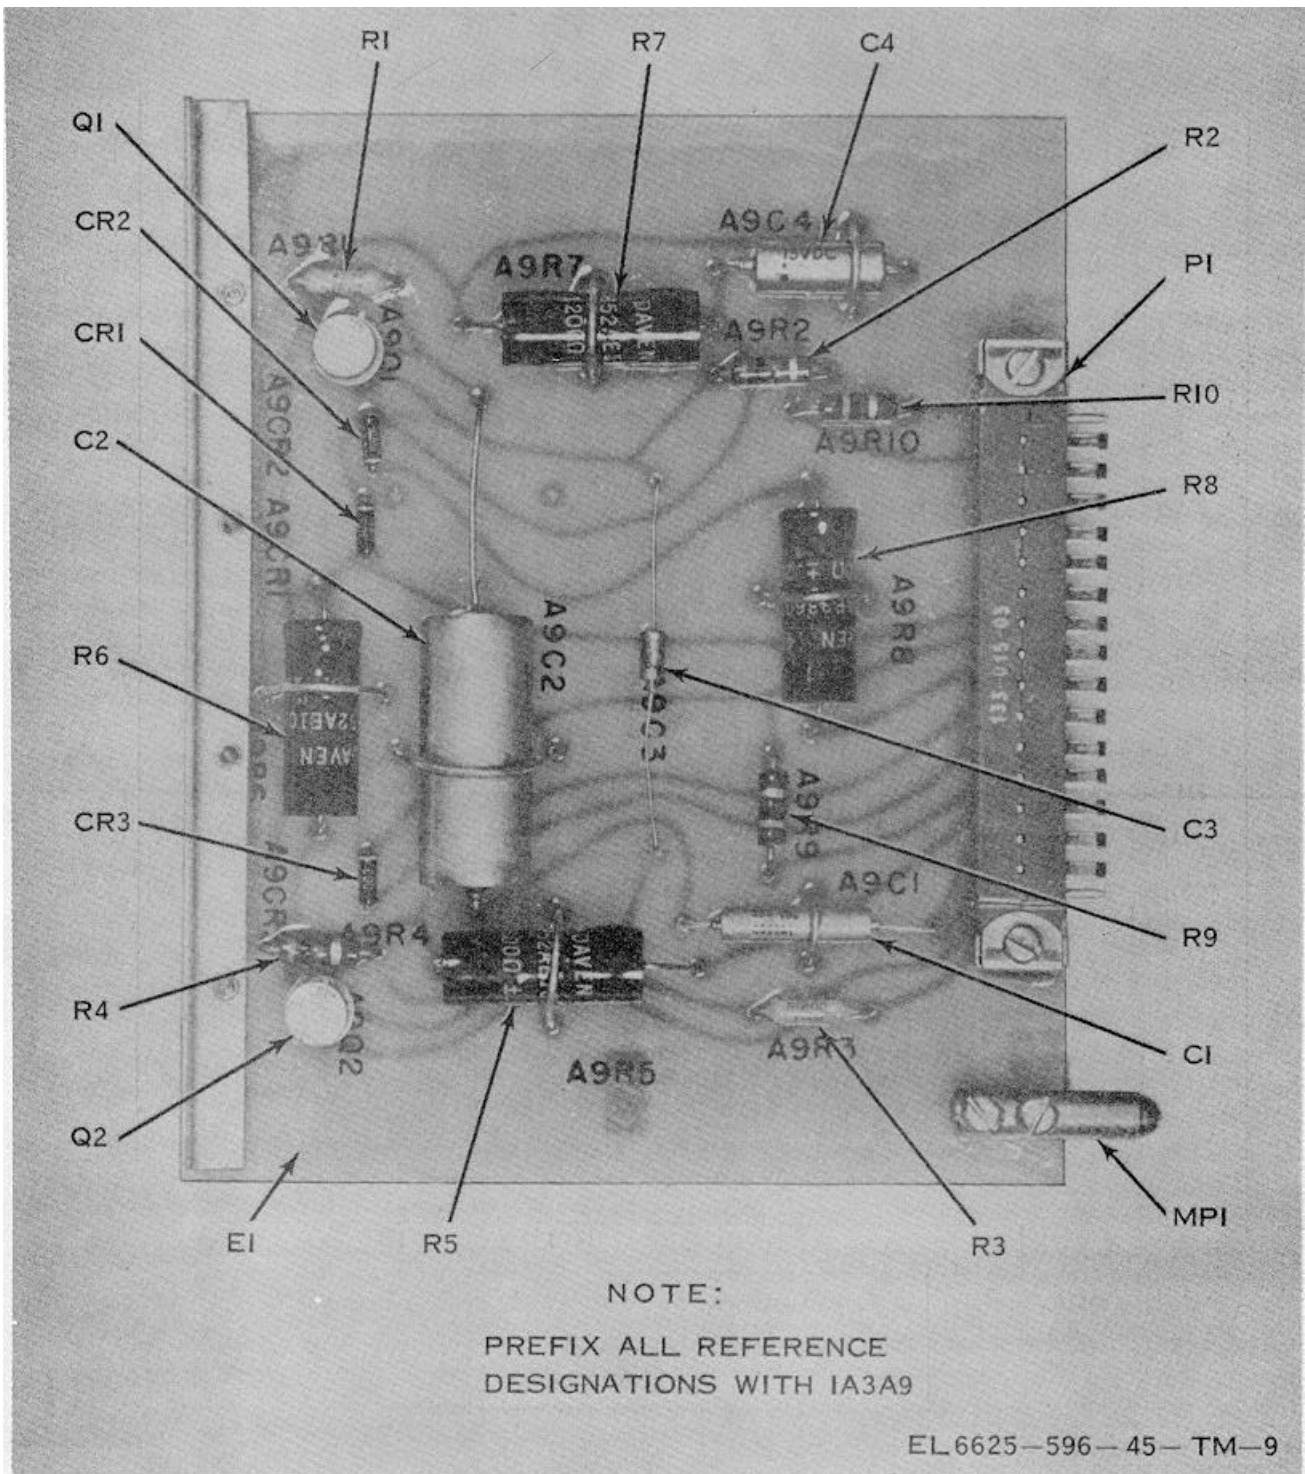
Dial percent break assembly 1A3A9, parts location.
